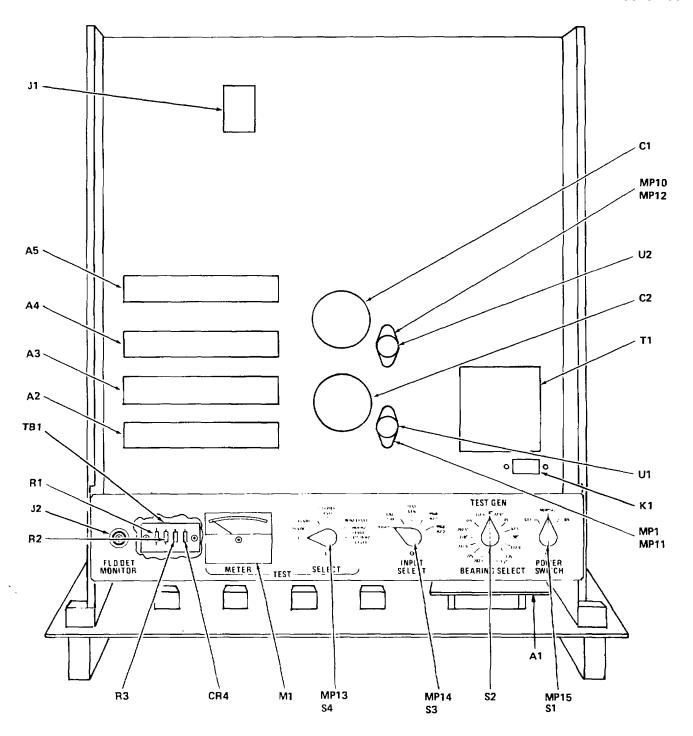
Monitor Front Panel and Chassis-Mounted Parts Location Diagram (Sheet 1 of 4)
